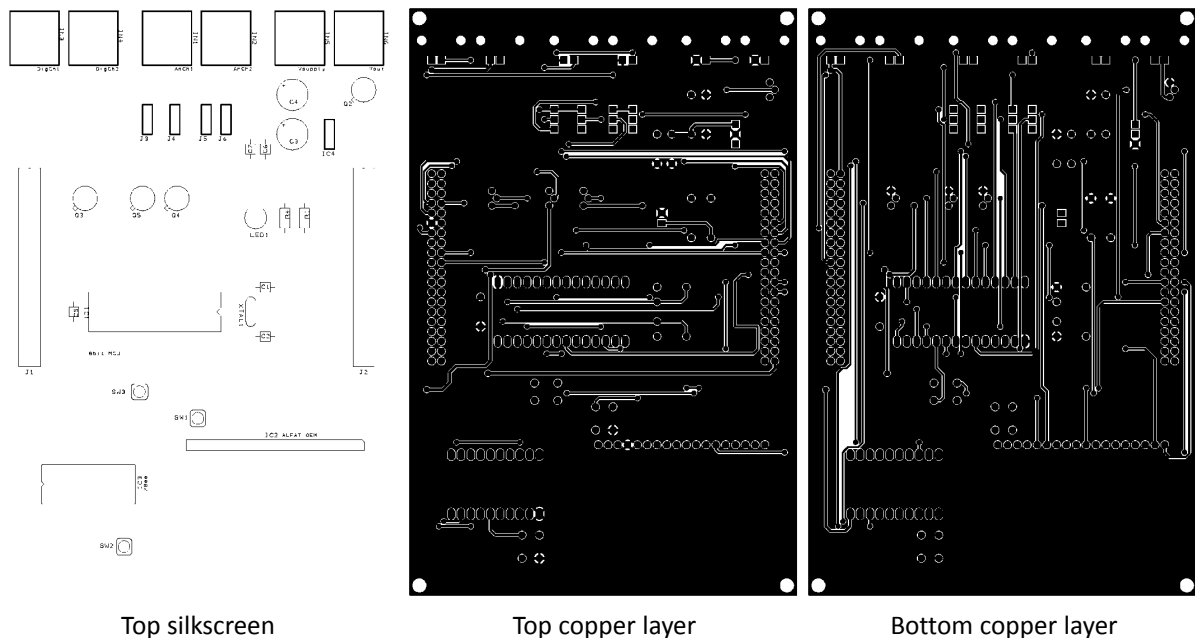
Printed circuit board layout (silkscreen, top and bottom layer)
